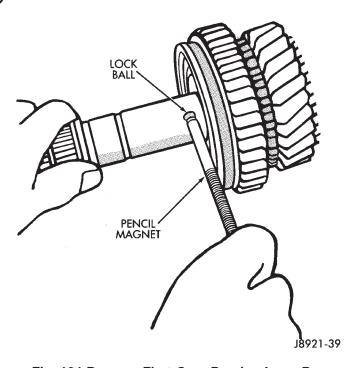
Remove First Gear Bearing Inner Race Lock Ball
